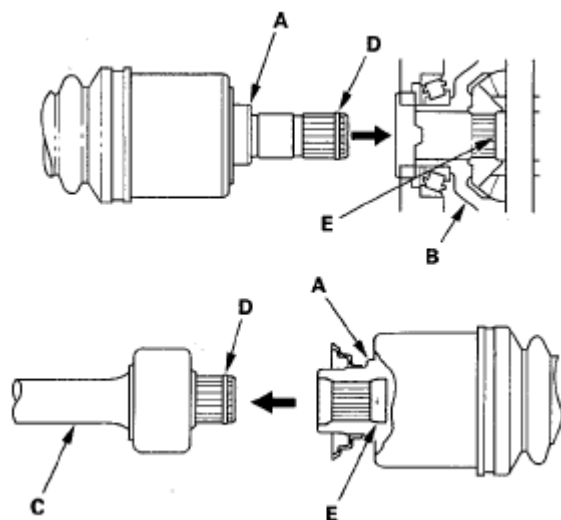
Identifying Inboard Of Driveshaft Into Differential
